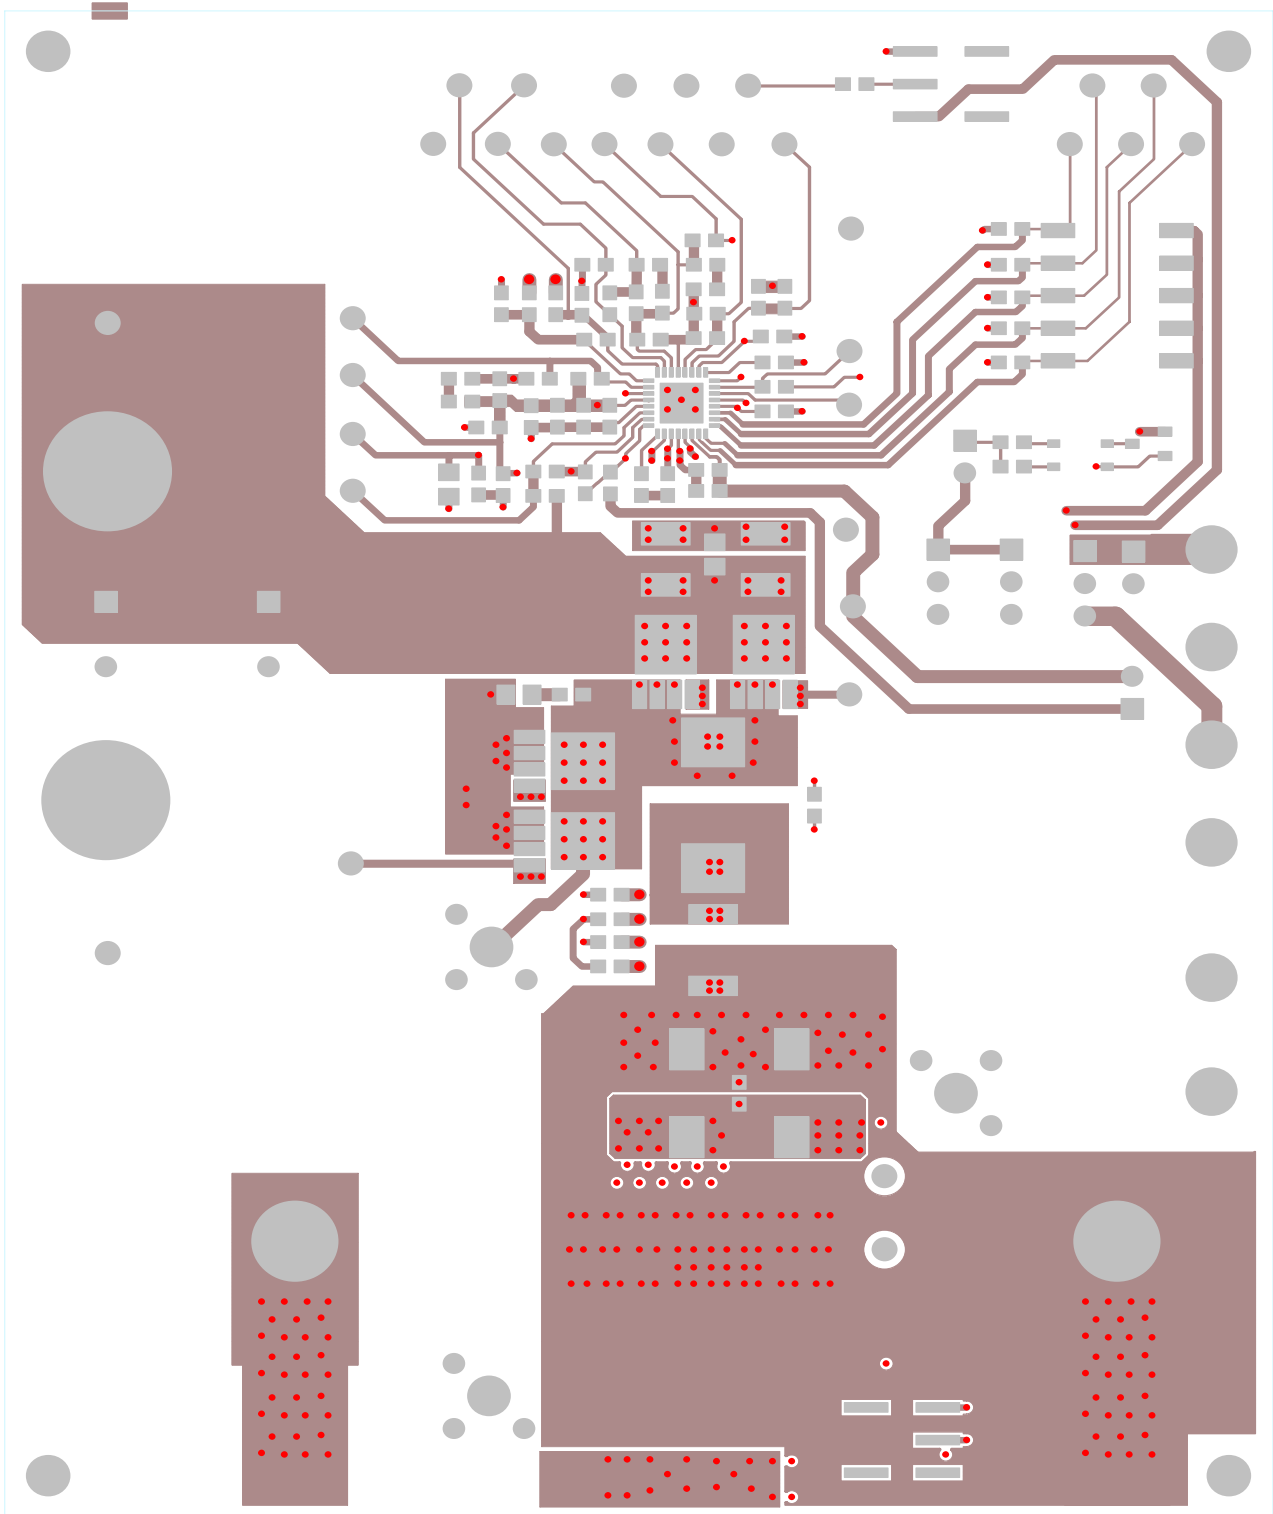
ISL6263CEVAL1/1Z and ISL6263DEVAL1Z EVALUATION BOARDS PCB TOP ETCH
